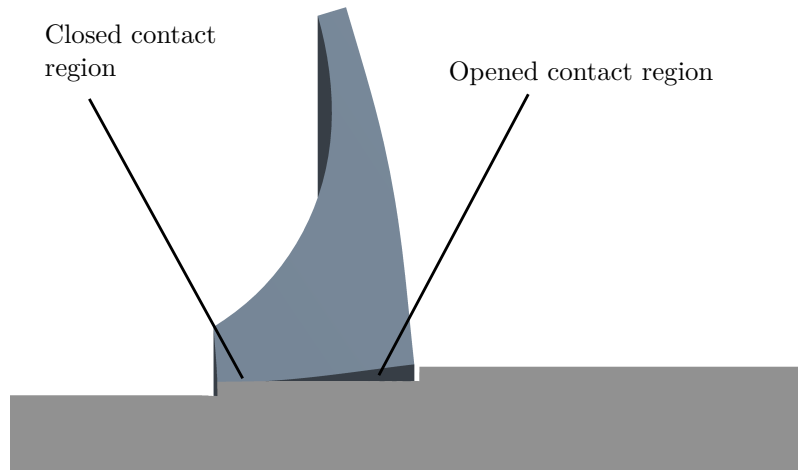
Visualization of contact region partial opening between the conical impeller and shaft
